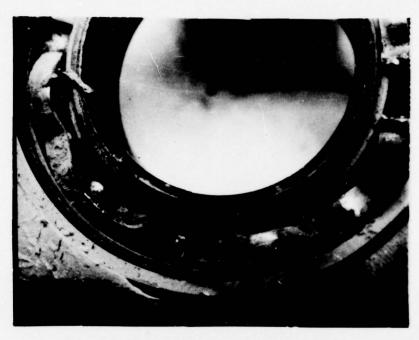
Bearing S/N TRL-4. 2.5x Enlarged View.
